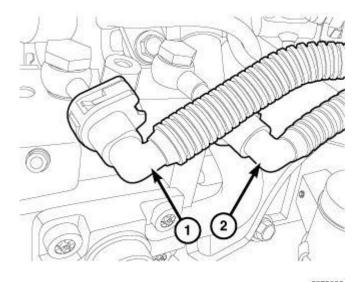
Low Pressure Supply Line & Return Line Courtesy of CHRYSLER LLC
